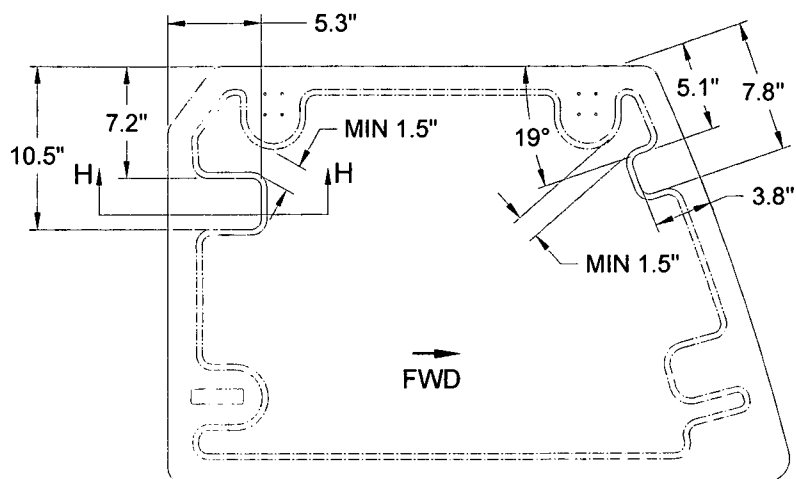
(a). D3186-1 SPACEPOD DOOR COMPOSITE MODIFICATION
